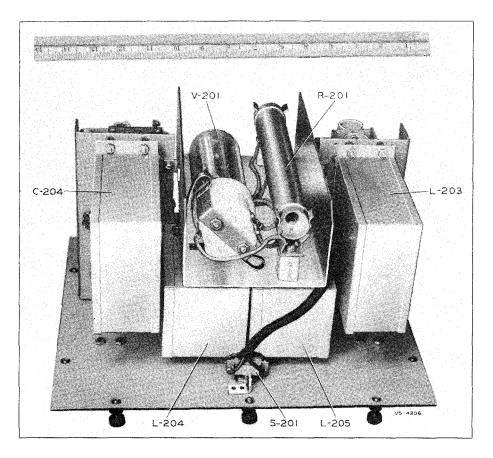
Power Unit CRV-20131 (Bottom View of Chassis)
